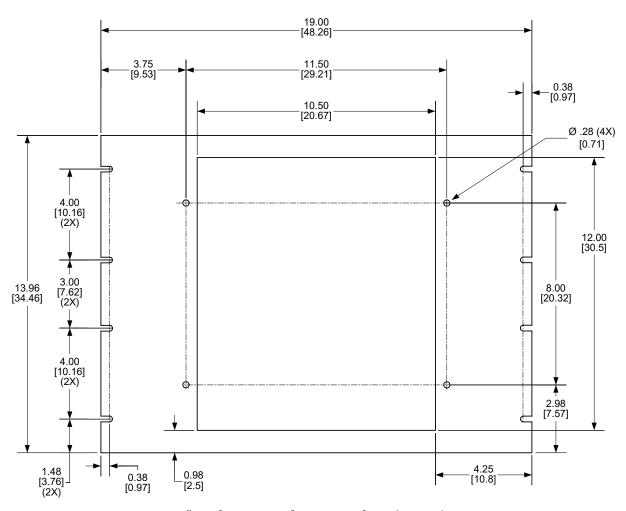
19" Rack Mount Adapter Panel Kit (B-1569) Dimensions
